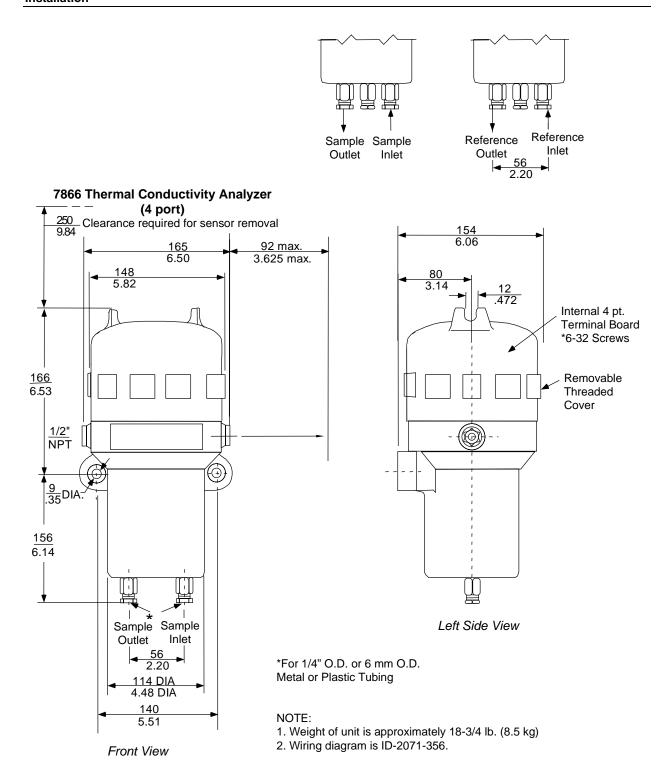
Outline and Mounting Dimensions for Sensing Unit
